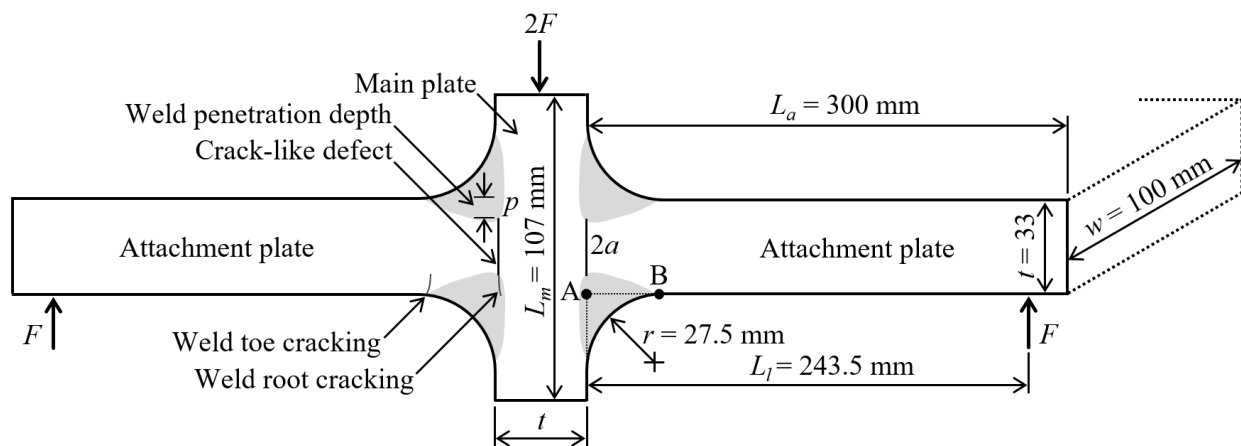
Schematic model of proposed cruciform fillet welded specimen under three-point bending
